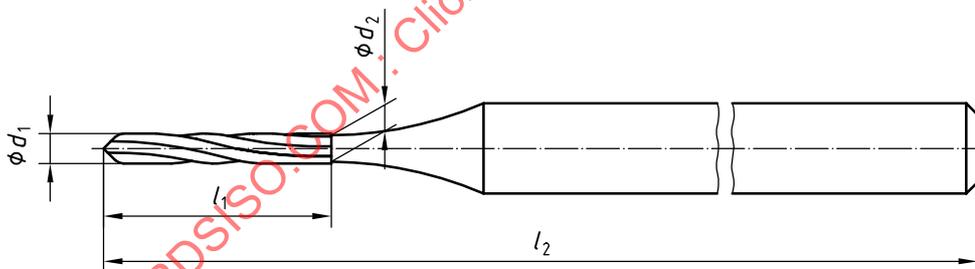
Torpedo, cylindrical, head length 6 mm, carbide finishing burs
